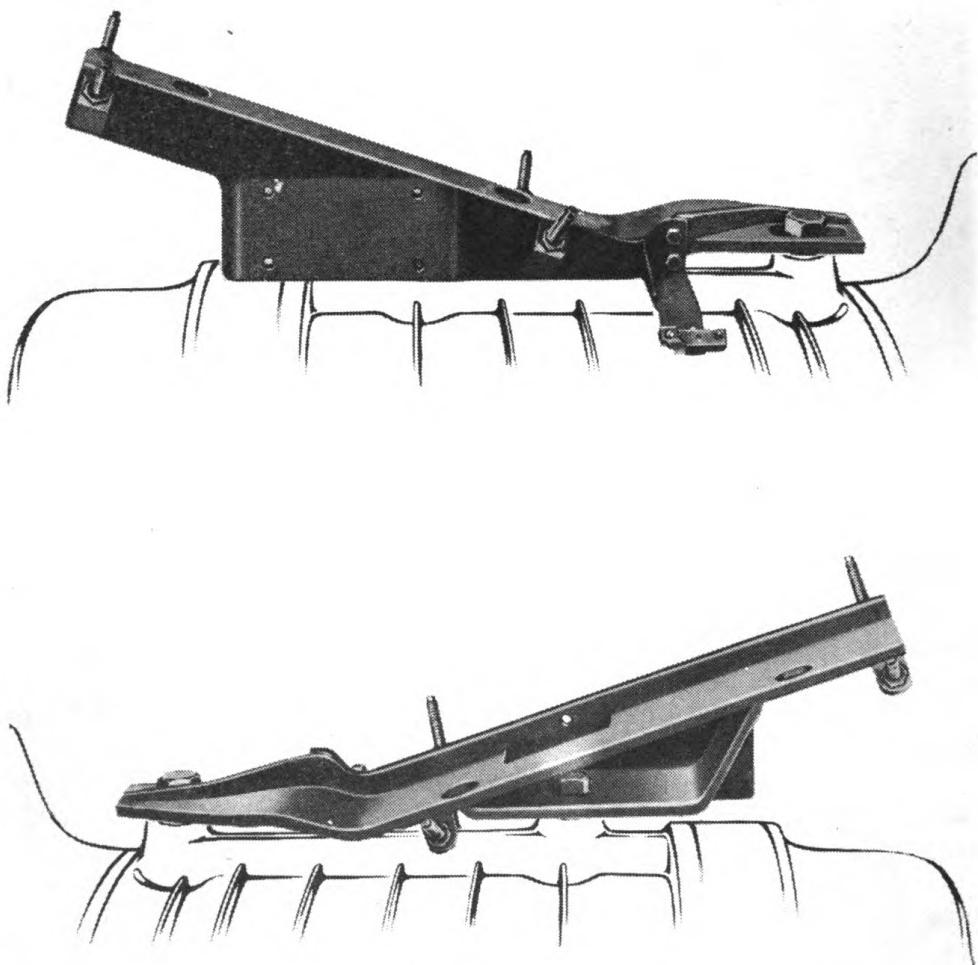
Baseplate viewed from assistant driver's seat (above) and driver's seat (below).
